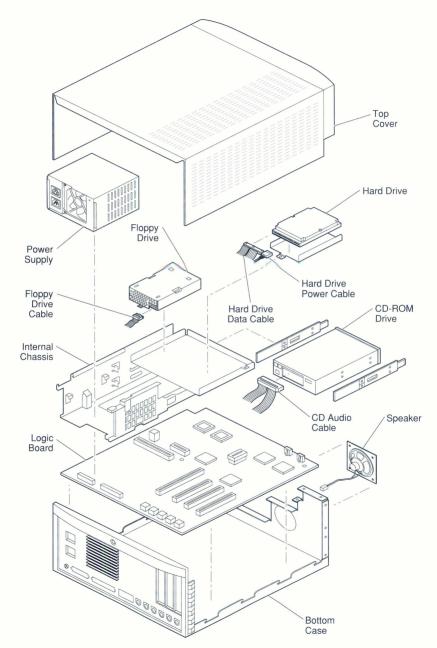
Macintosh IIvx, IIvi, and Performa 600 Exploded View
